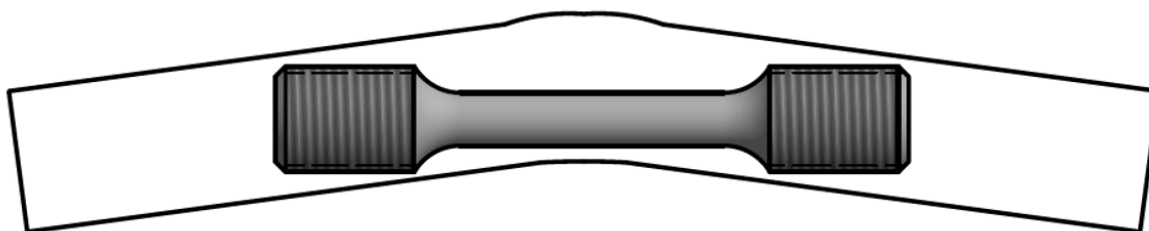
Depiction of tensile specimen orientation with respect to a welded 316L stainless steel plate.
